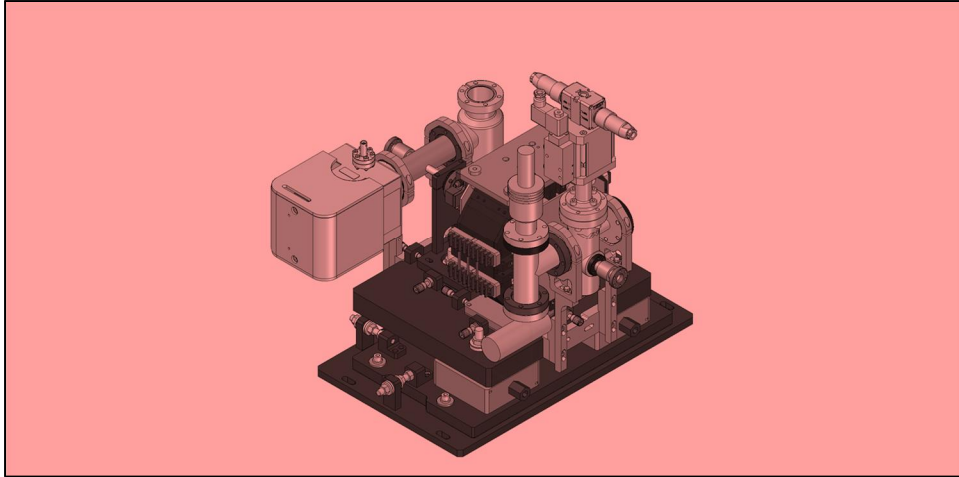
Interspace vacuum assembly, shown with pneumatic isolation valve
